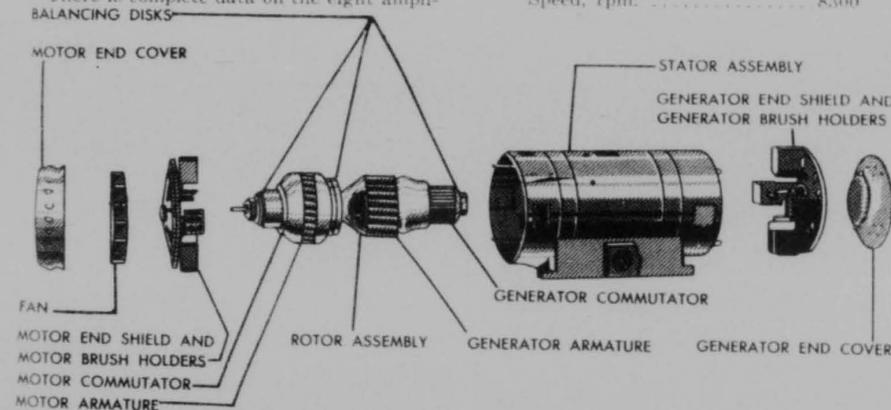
Ampidyne Motor-Generator with Major Parts Exploded.
